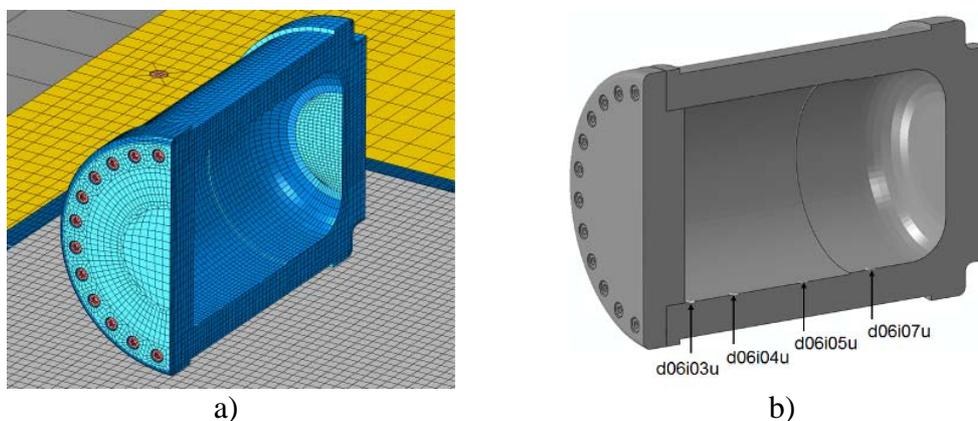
Horizontal drop test without impact limiters from 0.8 meter height onto a concrete foundation, (a) Finite element model, (b) Position of relevant measuring points
